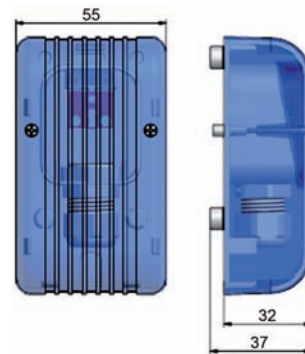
External temperature sensor in a casing for housing for surface mounting
